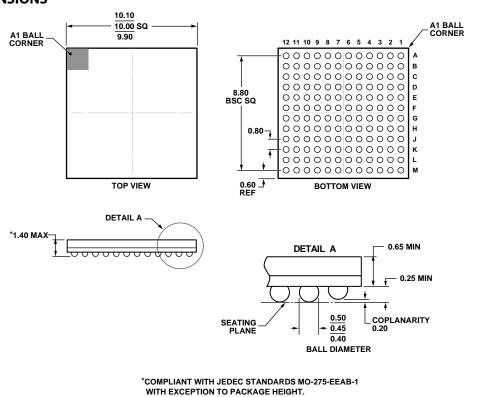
144-Ball Chip Scale Package Ball Grid Array [CSP\_BGA] (BC-144-1) Dimensions shown in millimeters
